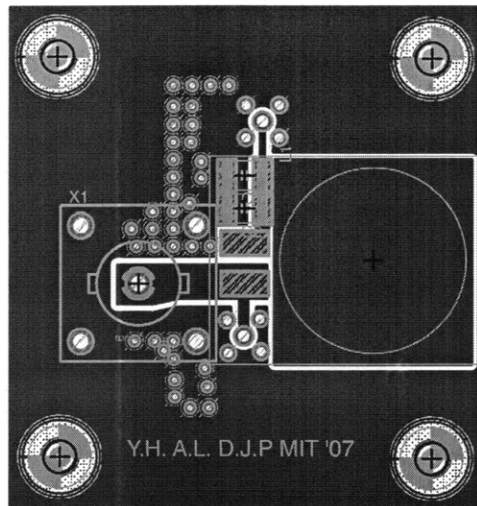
Circuit for measuring inductor quality factor PCB. Top layer.
